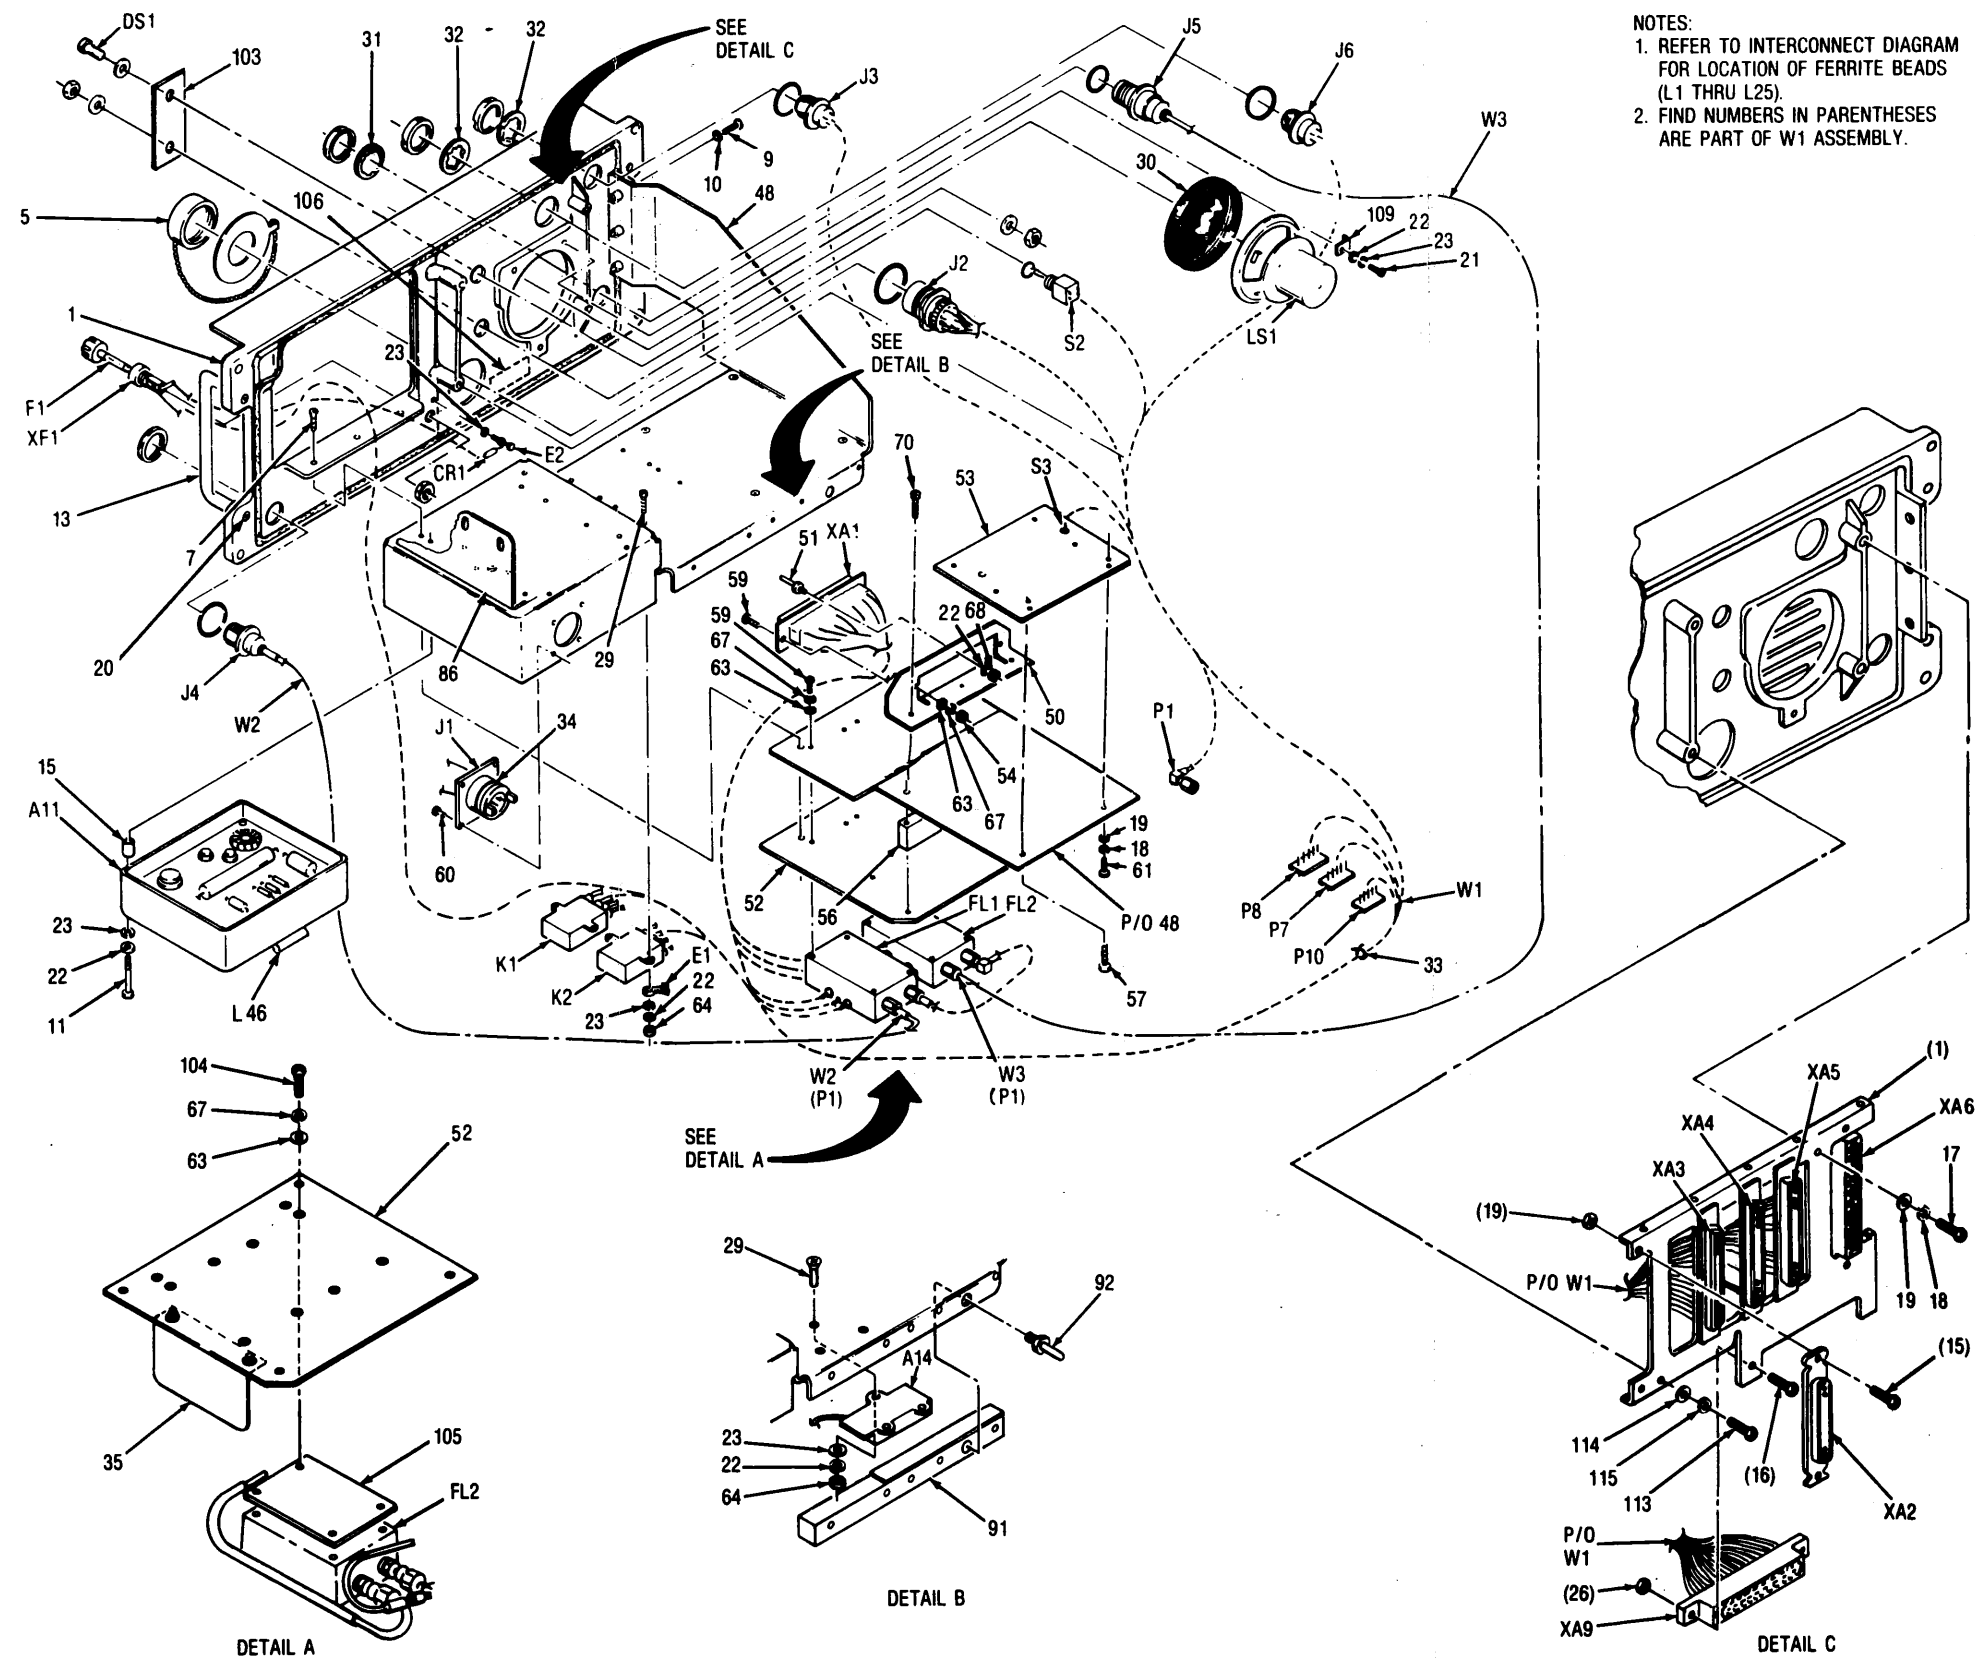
Transceiver, Showing Location of Components and Major Assemblies
